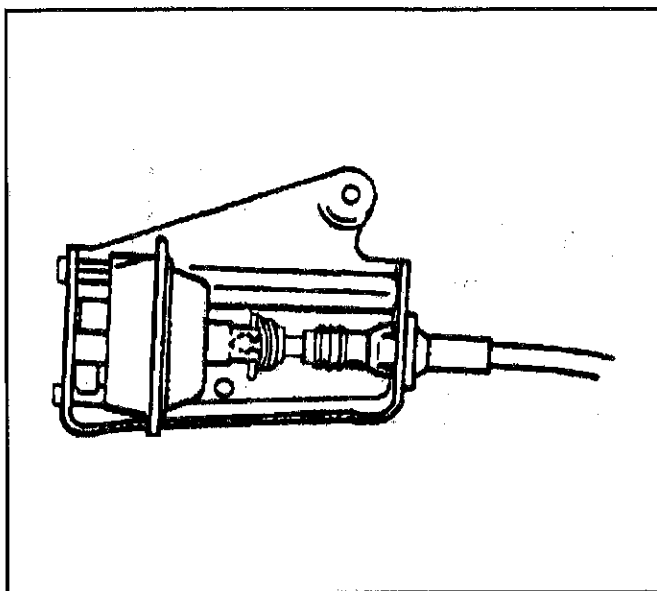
Connecting the Shift Cable to the Vacuum Actuator
